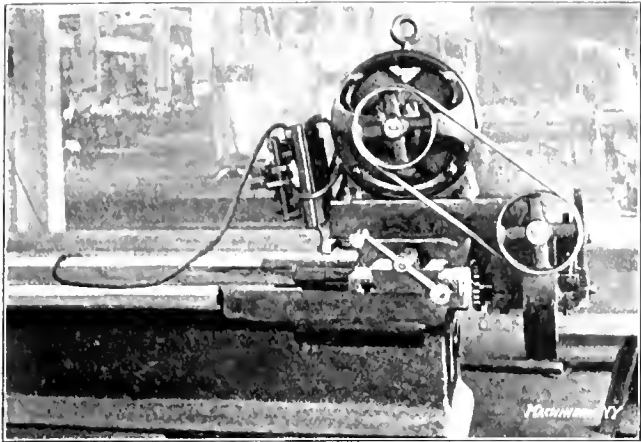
Portable Milling Machine for Facing Ends of Large Lathe Beds
